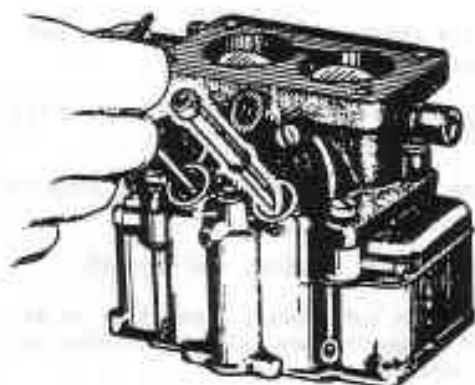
REMOVING MAIN DISCHARGE TUBE
